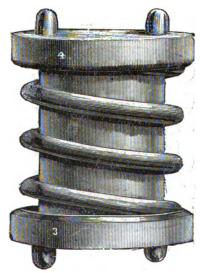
RUBBER-CENTRE SPIRAL-SPRING, 3. Spring-seat. 4. Spring-cap.
